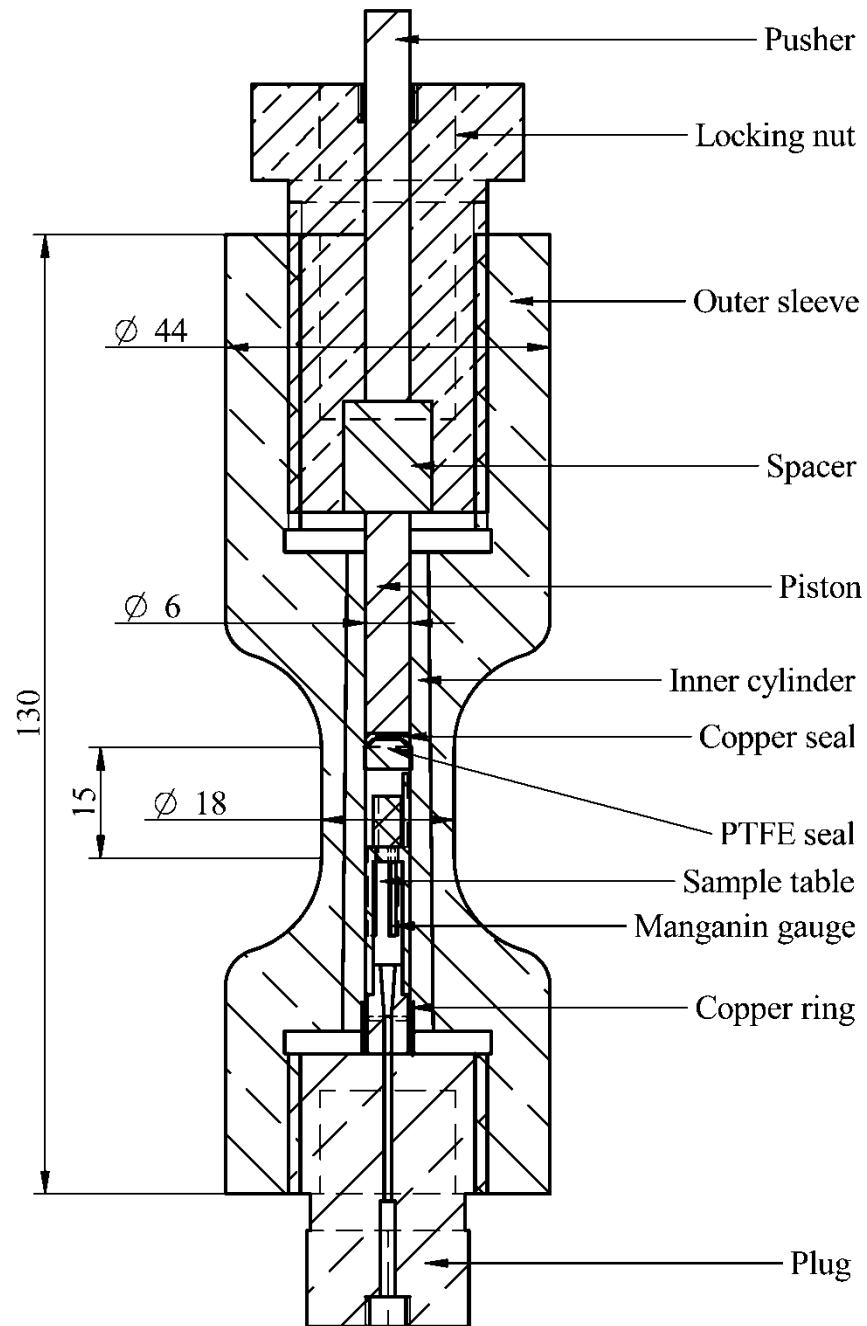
Cross-sectional view of the pressure cell assembly (dimensions are in mm).
